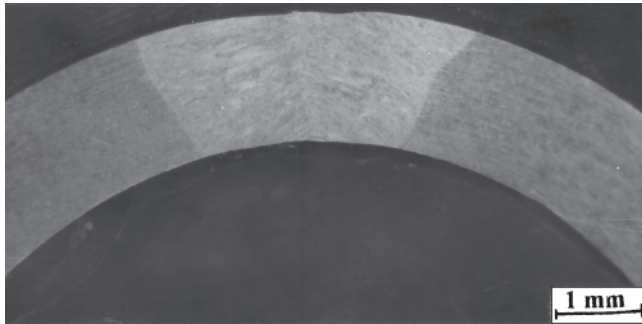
Transverse cross section of guided bend-tested LCW specimen
